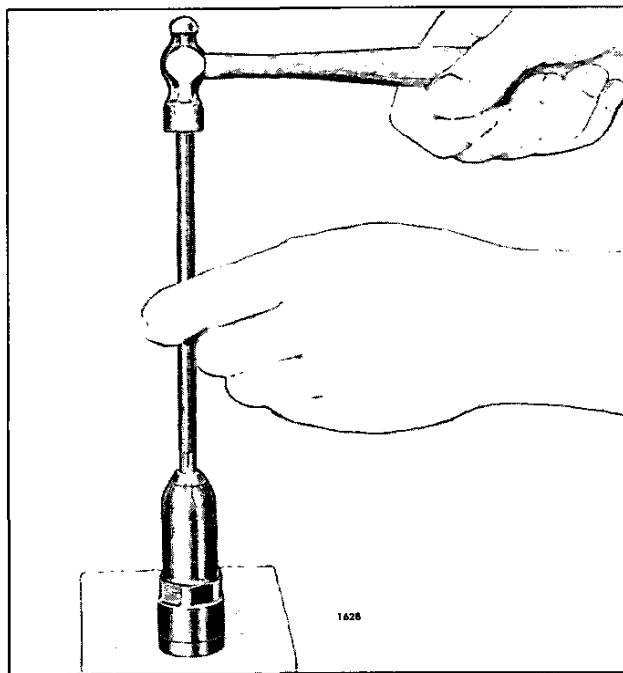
Removing Spray Tip from Injector Nut Using Tool J 1291-02
